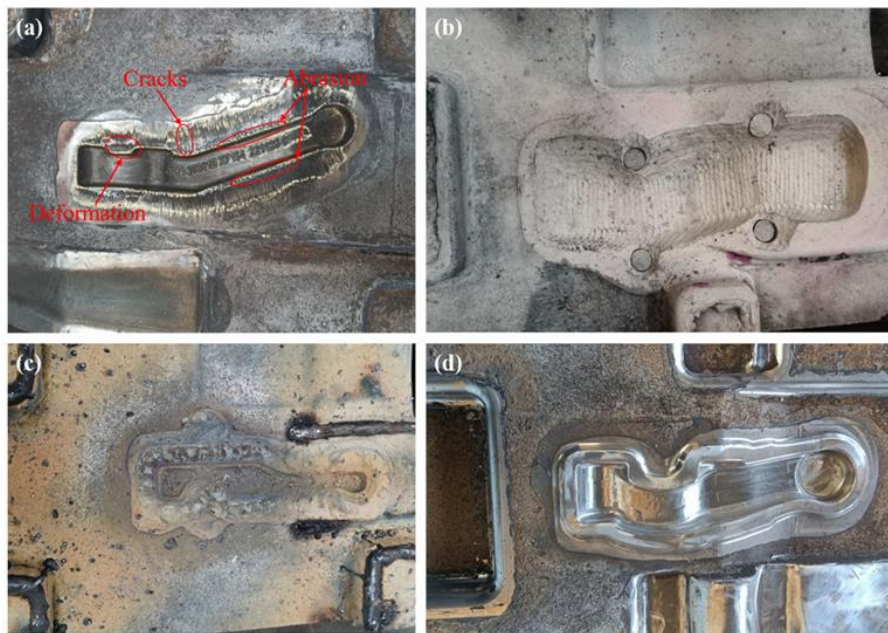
Main steps of hot forging die remanufacturing: (a) failed forging die with defects, (b) removal of the failure zone, (c) DED-arc deposition with multiple materials, (d) post-processing by machining and polishing [37].
